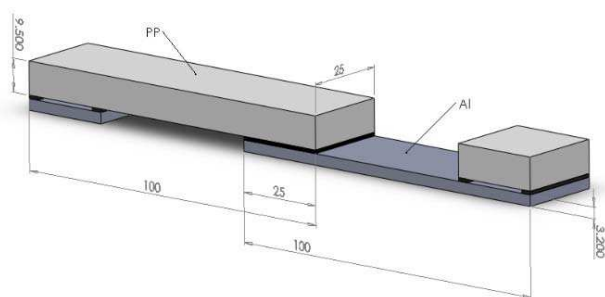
Typical single lap shear assembly used to evaluate the joint strength of aluminum-polypropylene hybrid specimens (dimensions are in mm).
